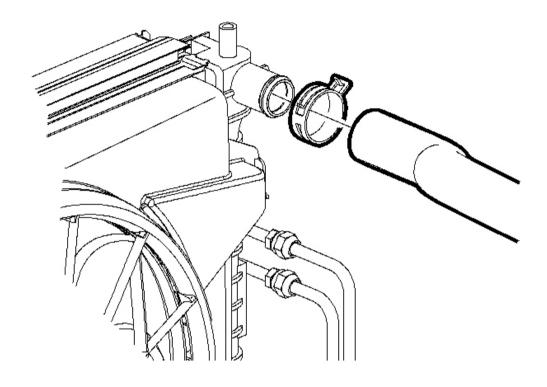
View Of Radiator Inlet Hose To The Radiator Courtesy of GENERAL MOTORS CORP.
